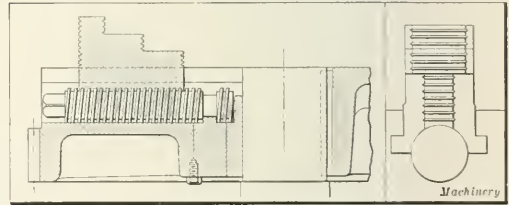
Heavy Independent-jaw Chuck with Spur Gear Drive Fig. 17. Jaw with Wide Base
